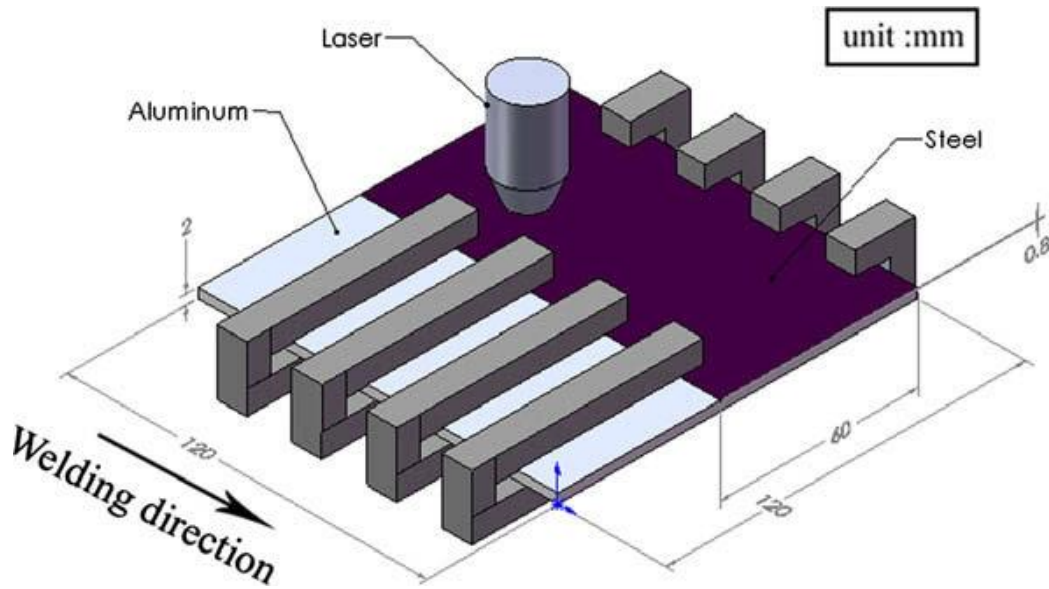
Schematic illustration of the steel/aluminium welding set up [7].
